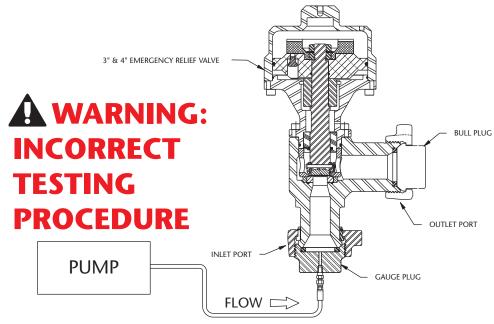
EXAMPLE OF IMPROPER TESTING
